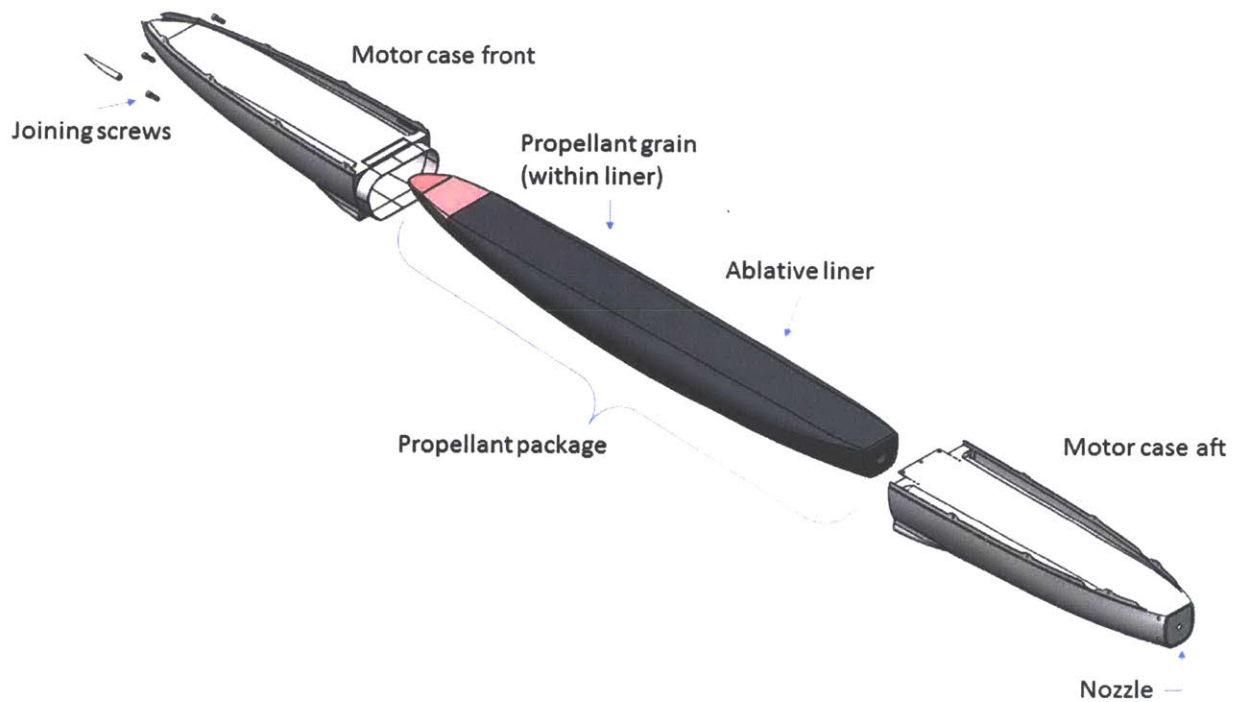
The mid-case joint allows the motor case to be assembled around the propellant package.
